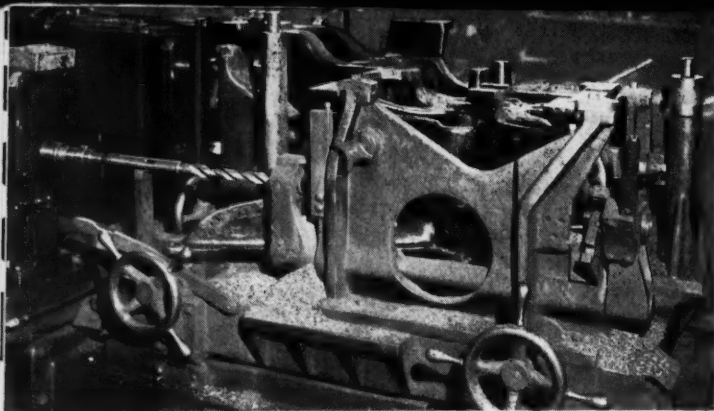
Drilling the Large Holes in the Base, Using a Natco Horizontal Drilling Machine
